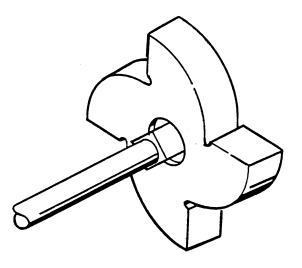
48731-006 Impeller Tool With Drive Wrench
